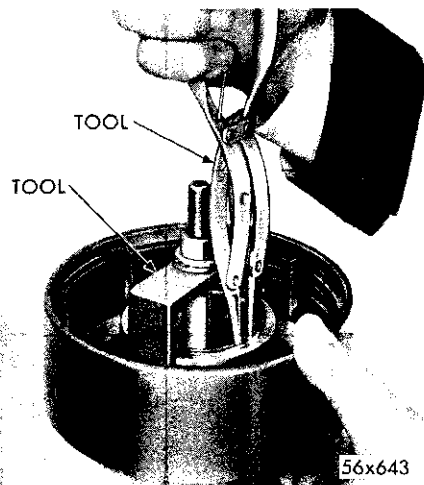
Removal and Installation of Rear Clutch Spring Retainer Snap Ring
